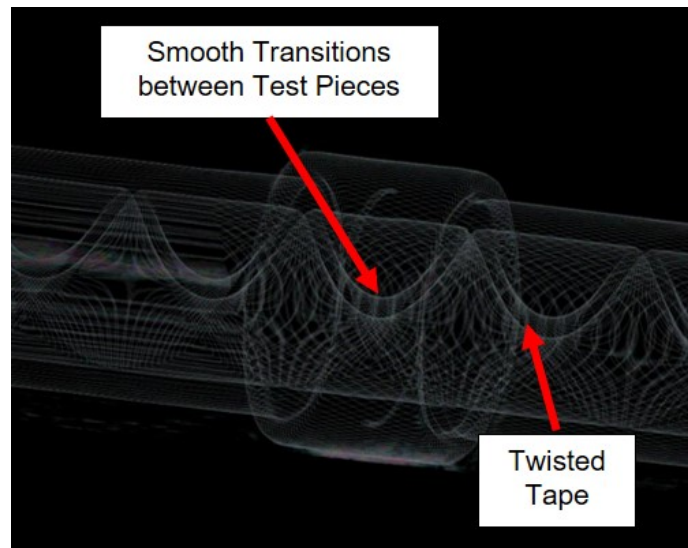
CT scan showing coupling mechanism to create a smooth transition between printed pieces.
